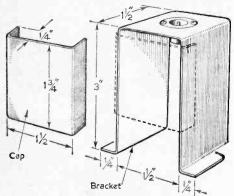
The mounting bracket for the coaxial socket in the R.F. stage.
